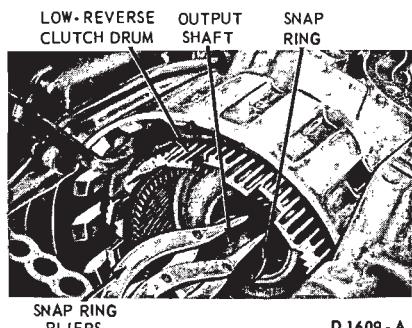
Removing or Installing Reverse Ring Gear Hub Retaining Ring
